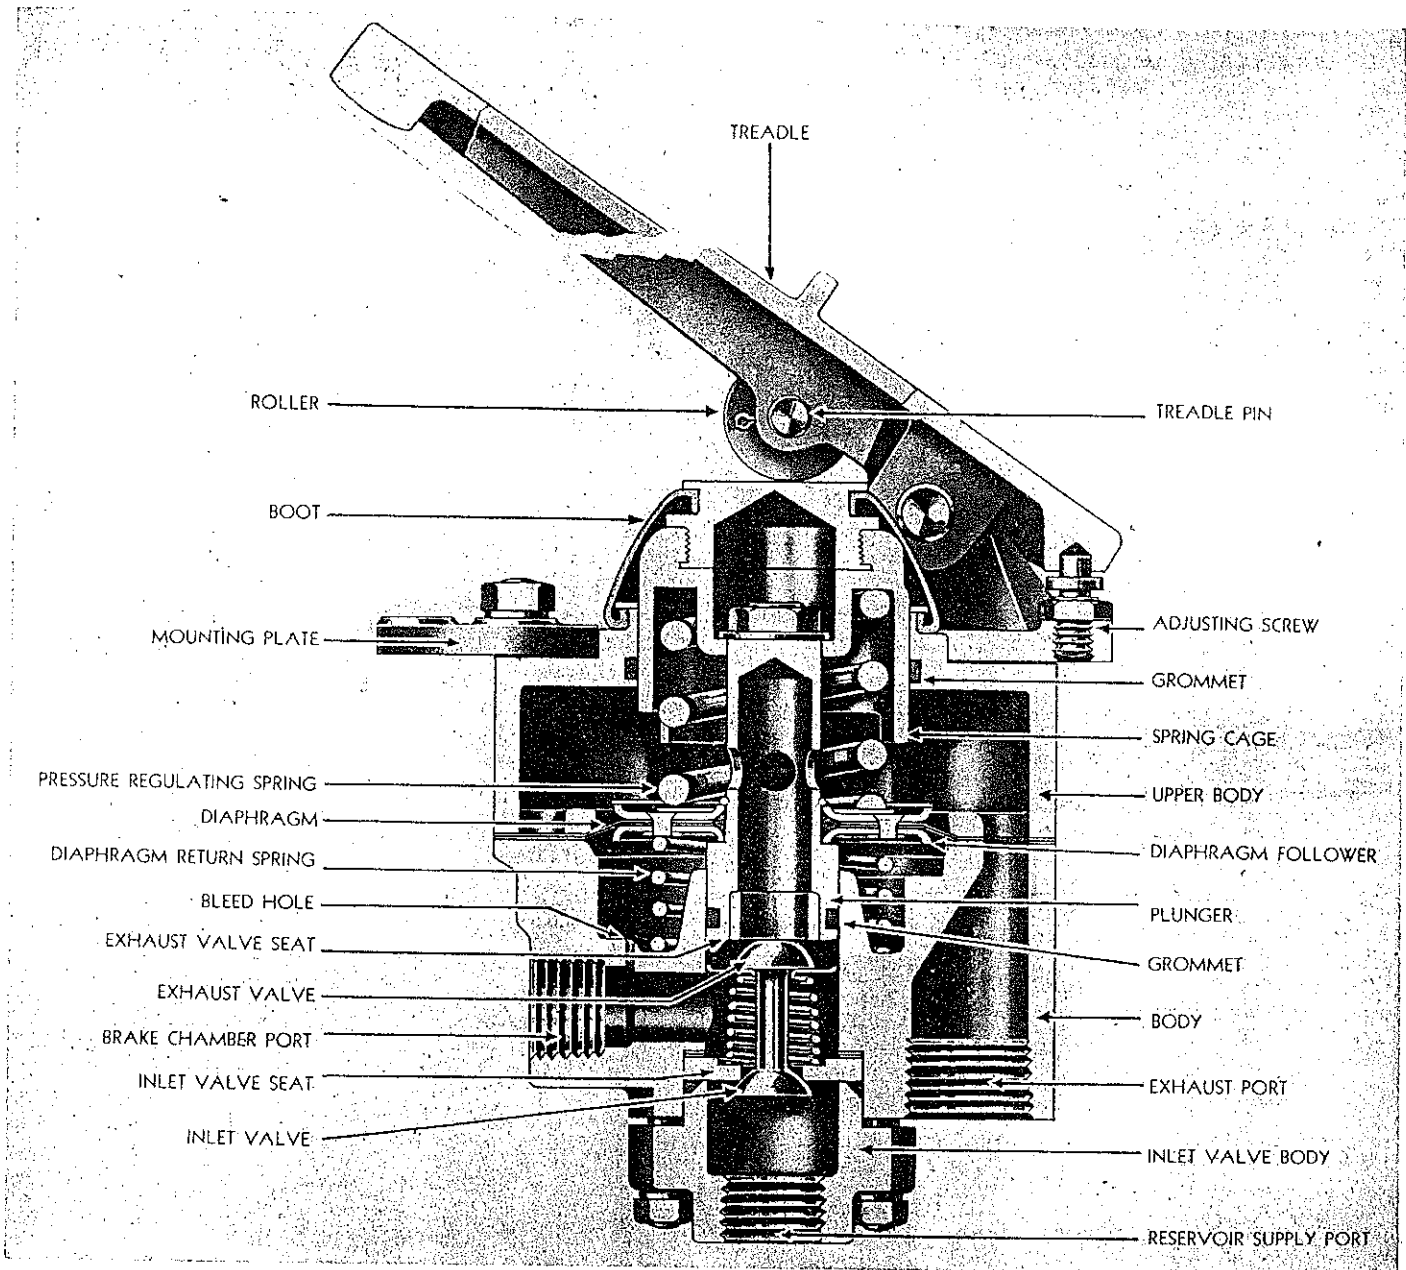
Sectional view of Type D-1 Treadle-Operated Brake Valve
